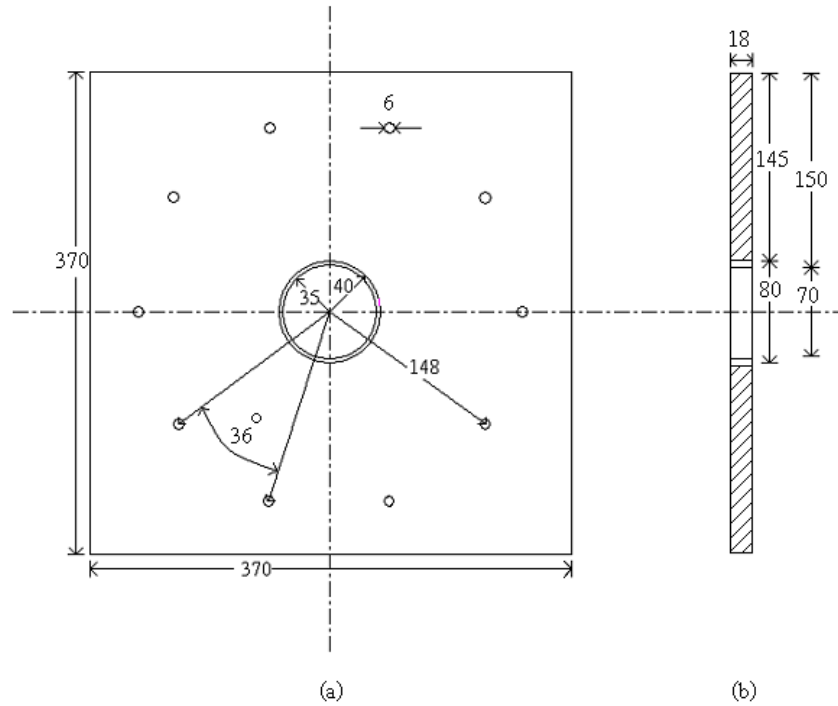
End shield (parallel plates), (a) front view and (b) side view
